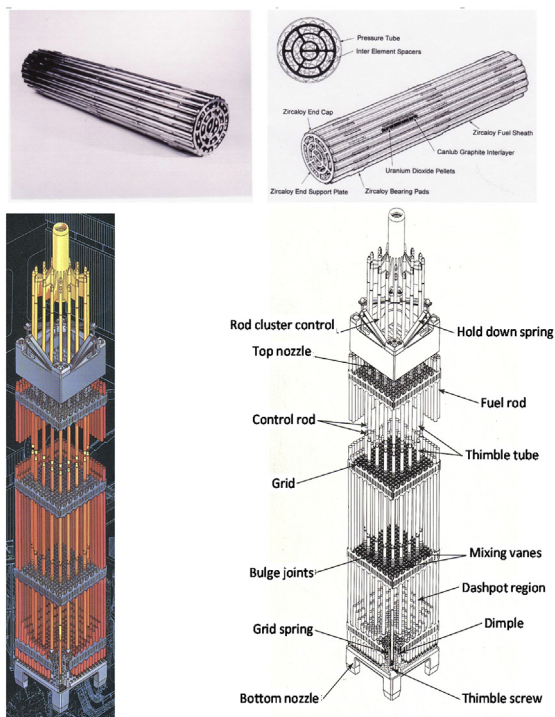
Typical fuel assemblies: upper, CANDU; lower PWR.
